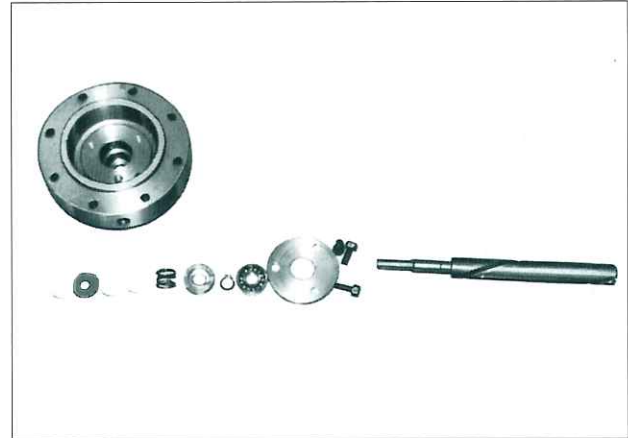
B Unloader Indicator Cylindrical Cam Portion, Disassembled View
